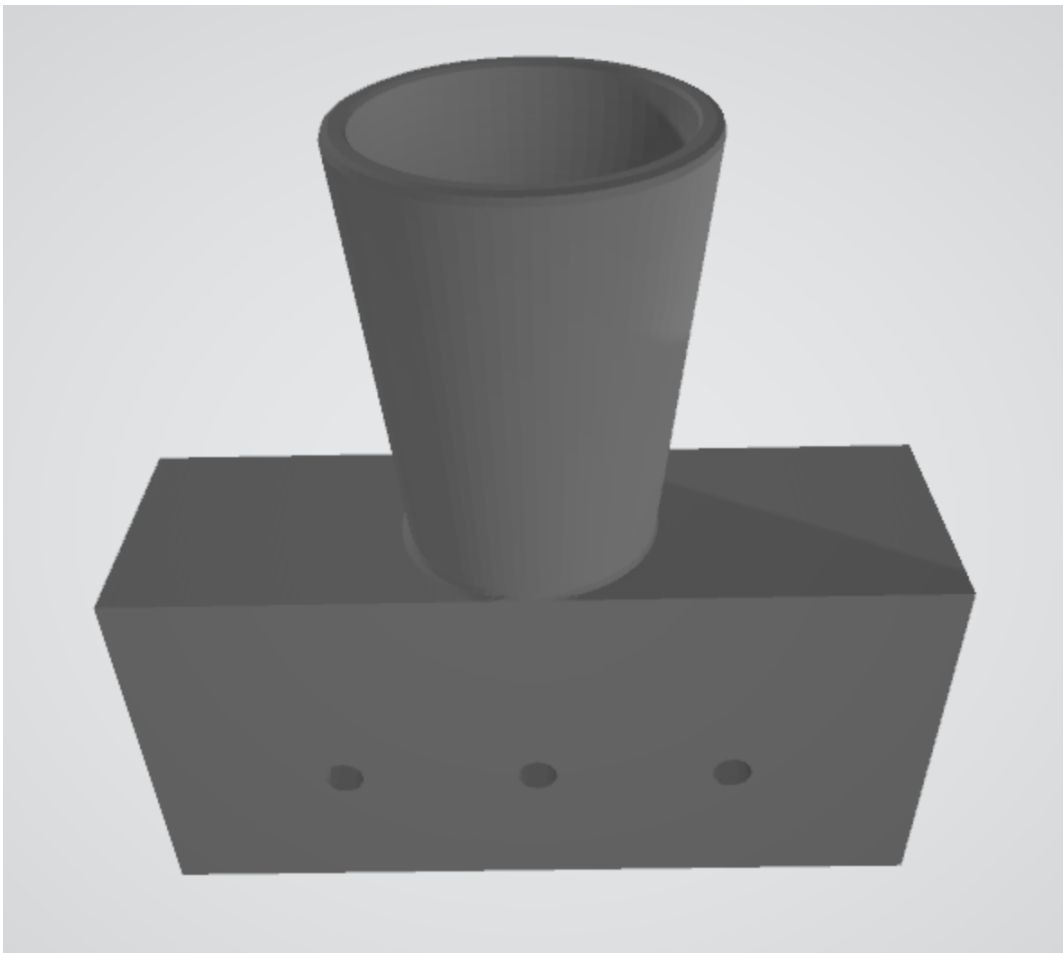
A 3D model of the 3D printed female part of the ball joint.
